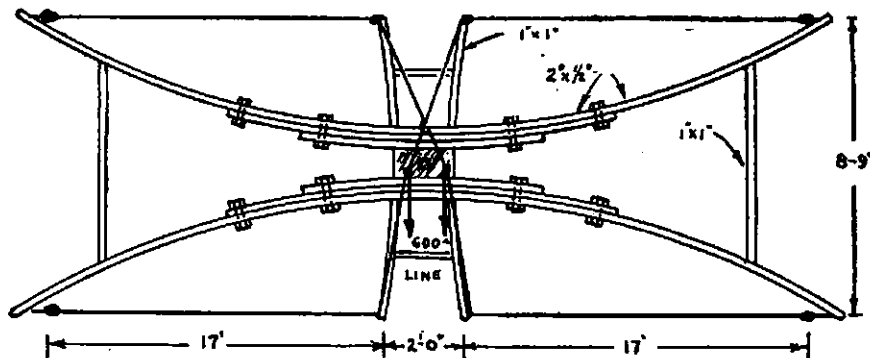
Constructional Details of the Cheap Beam. Plan of the bows and cradle.
